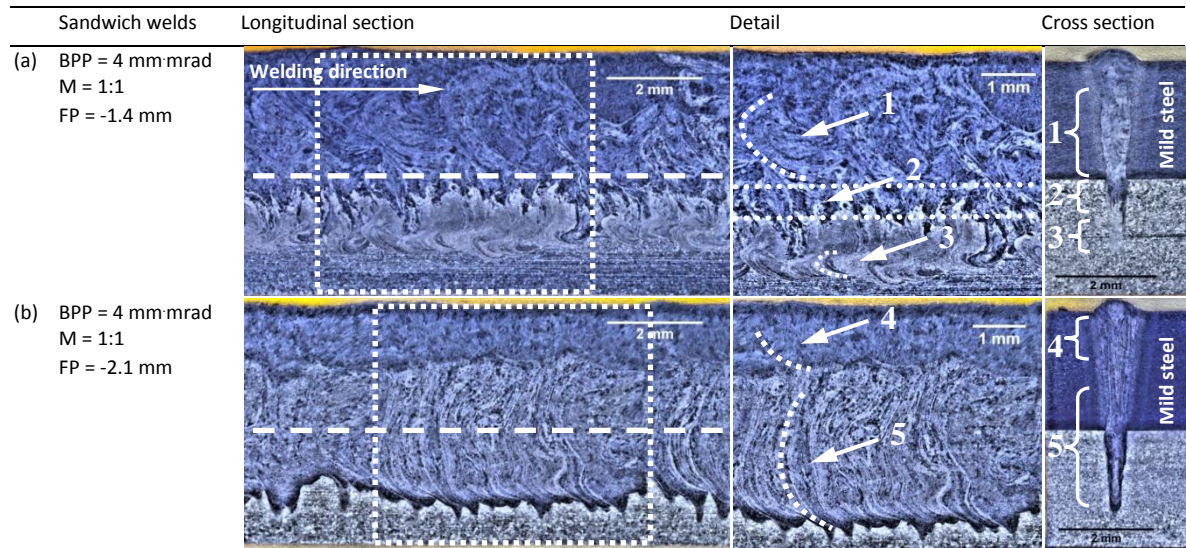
Sandwich configuration welds (top sheet of mild steel S235JR, bottom sheet of stainless steel X5CrNi-18-10) to visualize melt flow behavior at different focal positions.
